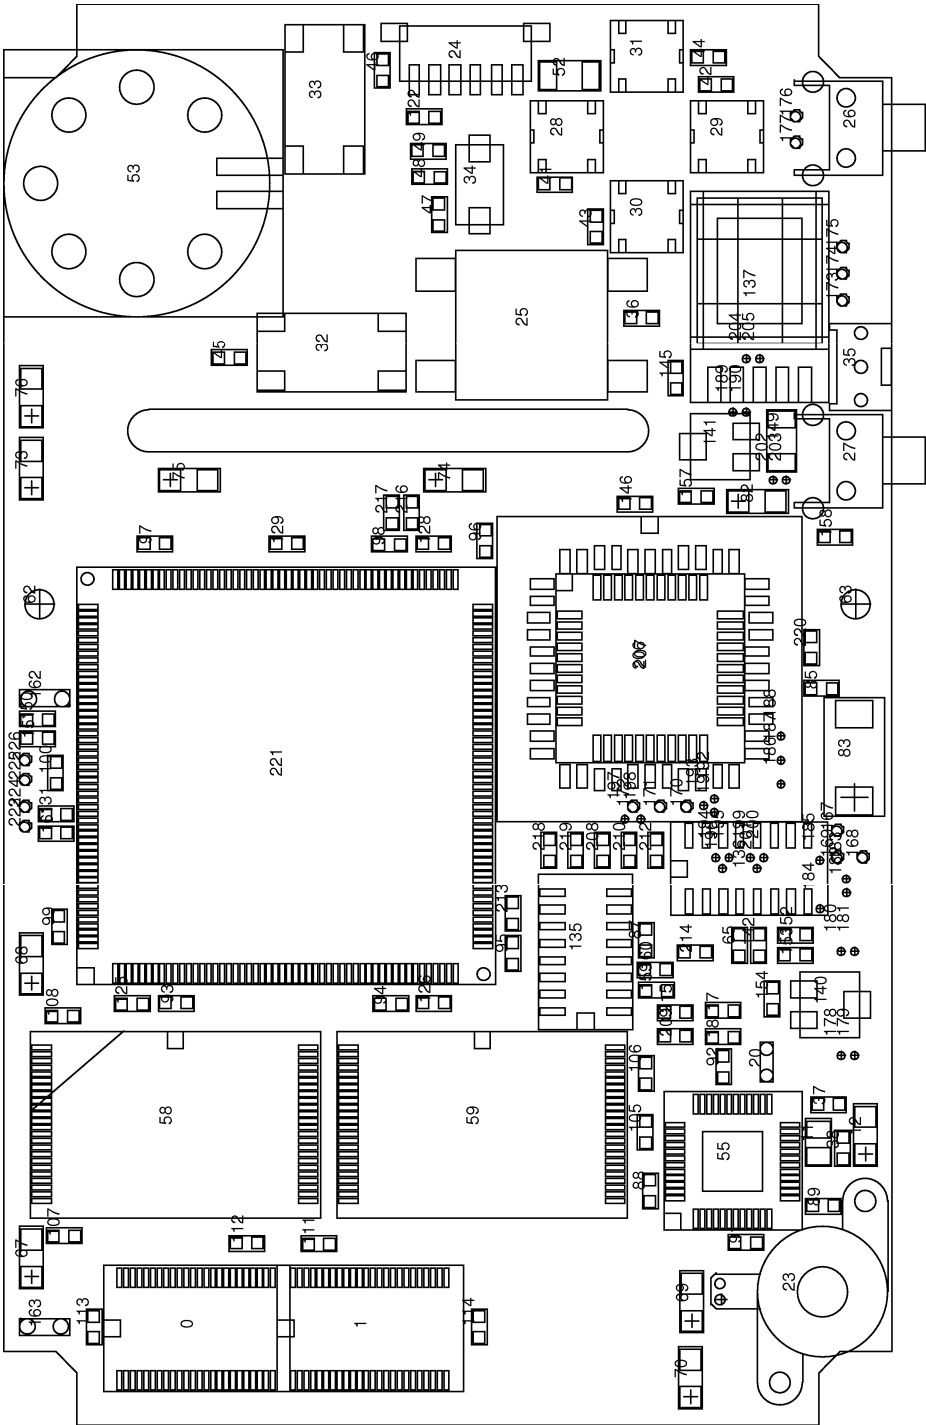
Itsy mother-board version 1.5: top-side PCB layout.
